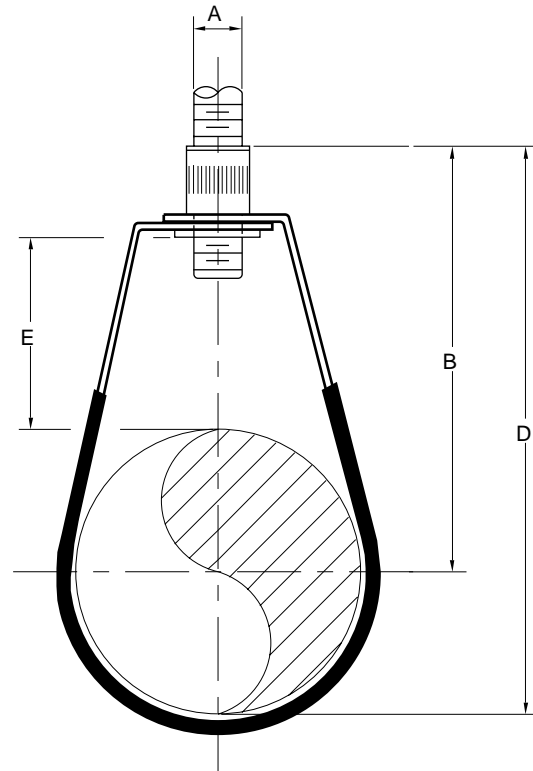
PVC - PVC COATED ADJUSTABLE SWIVEL RING
